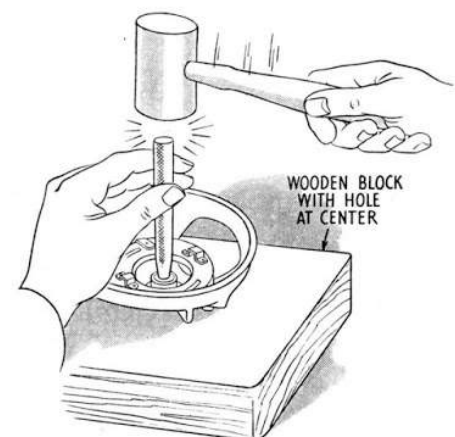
Punching out the metal and felt oil discs from motor head casting
